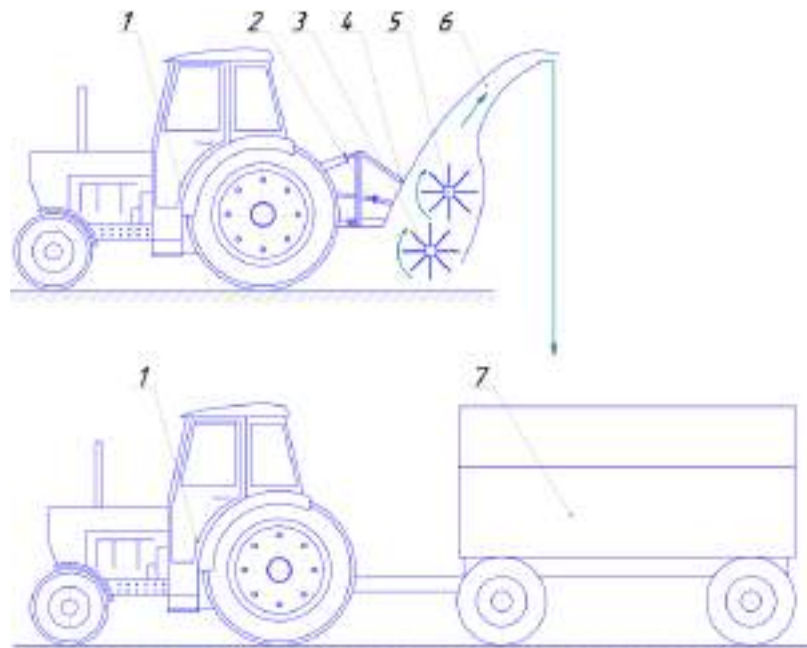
Trailed unit for cutting and chopping bushes: 1 – tractor; 2 – cardan drive; 3 – shredding rotor; 4 – device frame.
